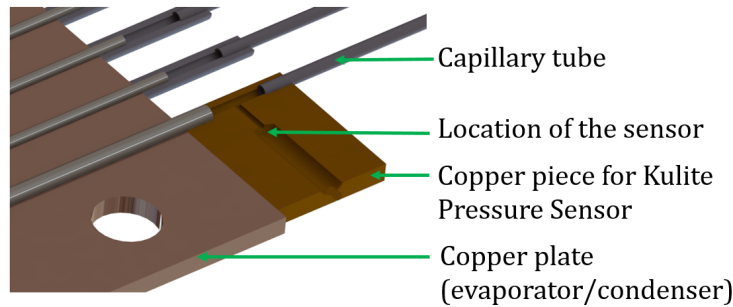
Section cut of the copper piece for a Kulite pressure sensor.
